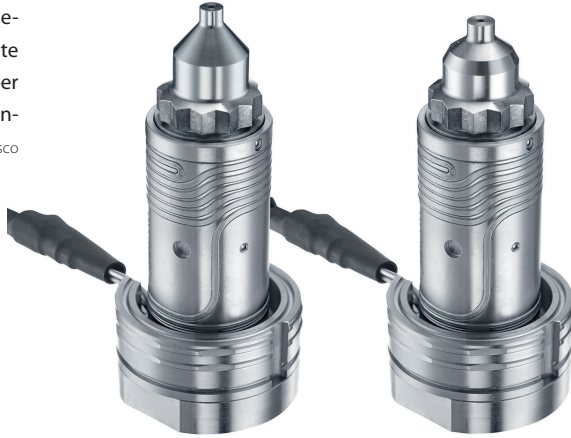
The 3D-printed Stream-runner hot runner manifold opens up new design options for multicomponent injection molding.
